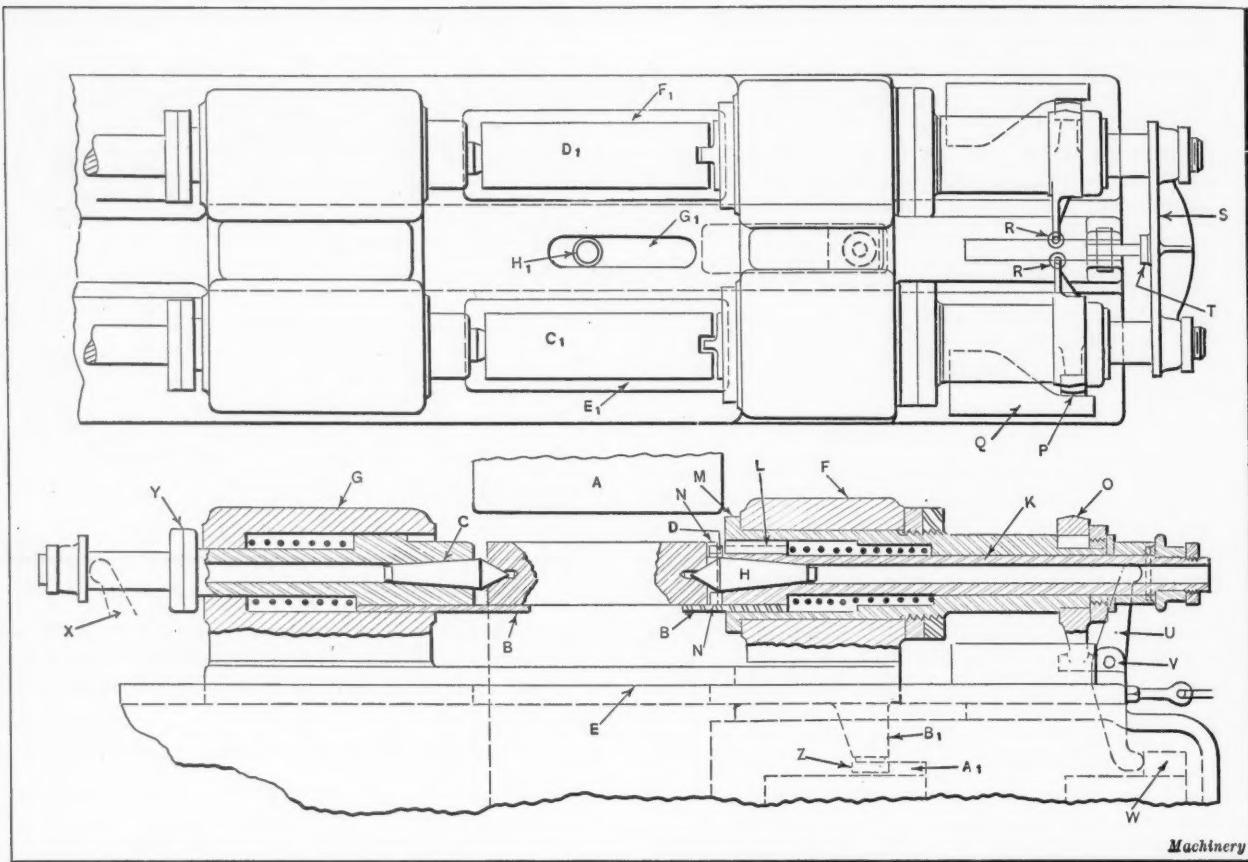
Work-holding Carriage of Automatic Groove-milling Machine
